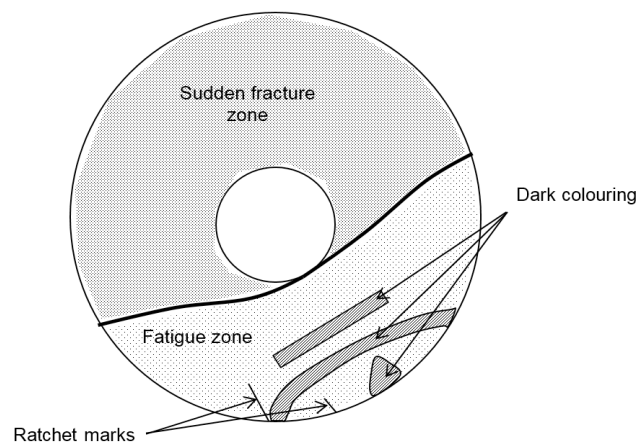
Fractographic description of the fracture surface of blade No. 2 pre-load bolt
